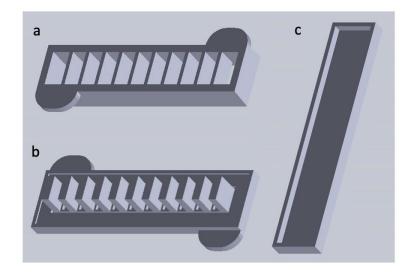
Mould components for casting the actuators. (a) and (b) are assembled to make the chambers, while (c) is used for the base.
